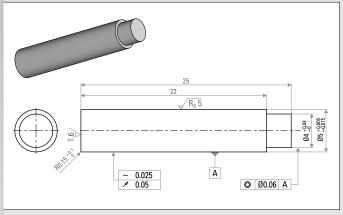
Technical drawing of precision tuwrned component made of AISI 304 (1.4301) with dimensional, shape and position specifications including tolerances in mm.
